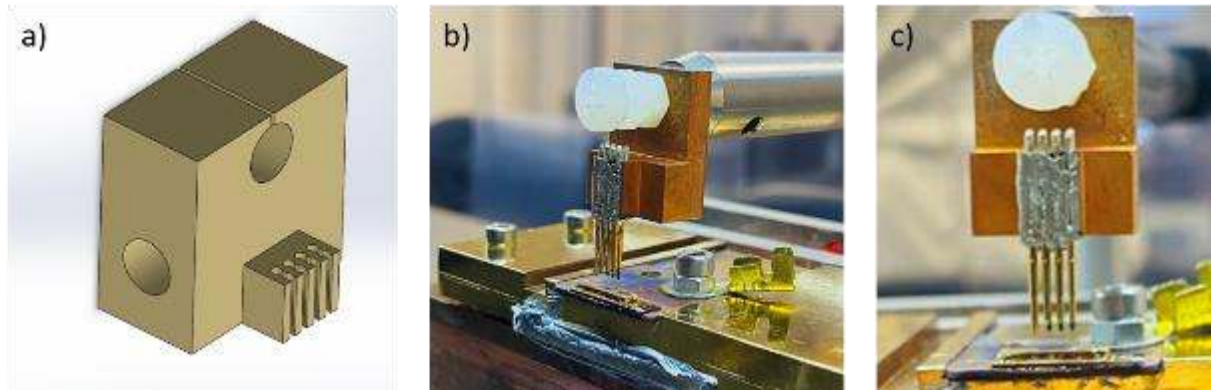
a) Probe Design-2 schematic view from SolidWorks, b, c) The picture of manufactured probe design-2
